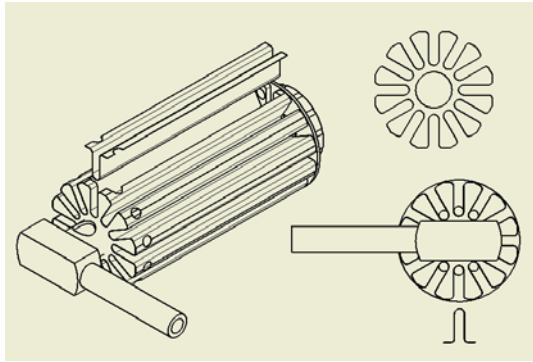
Omega recuperator partially assembled (left); separate drawing of flower disc (top right); bottom view of recuperator (middle right); Cross section through Omega heat transfer membrane (bottom right).
